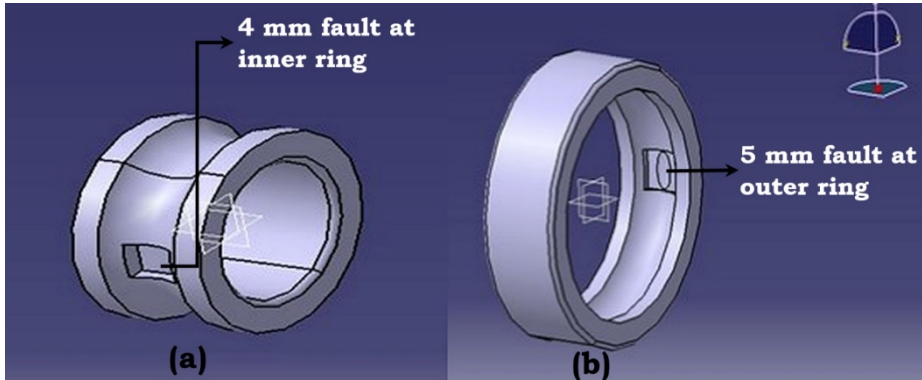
(a) Defect in the bearing's inner ring (b) Defect in the bearing's outer ring.
